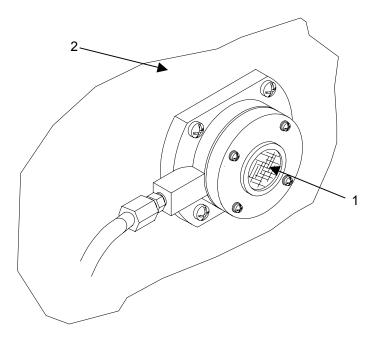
Clean the Fuel Regulator Assembly Air Vent
